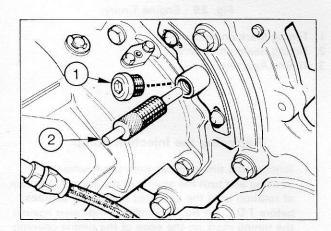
Injection Pump Timing - General Purpose Governed Pumps
